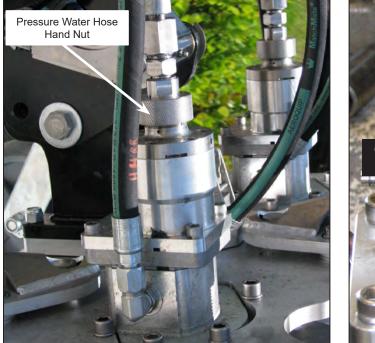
Apply anti-seize to the thrust housing threads and install the high pressure water line.
